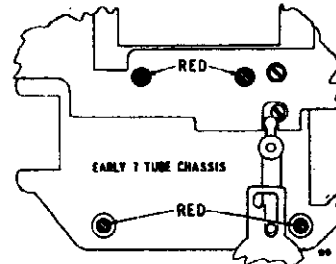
Location of 4 Red Mounting Screws in Early Models
